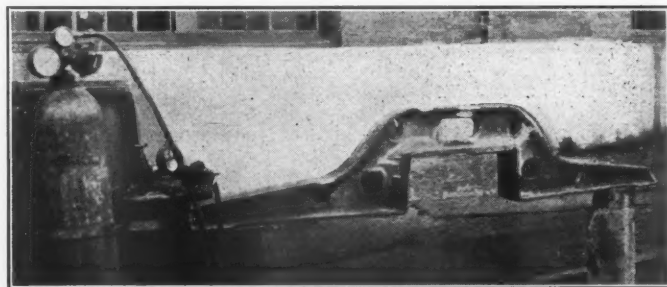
Needle Beam, Shown in Fig. 5, As Repaired by Gas Welding
